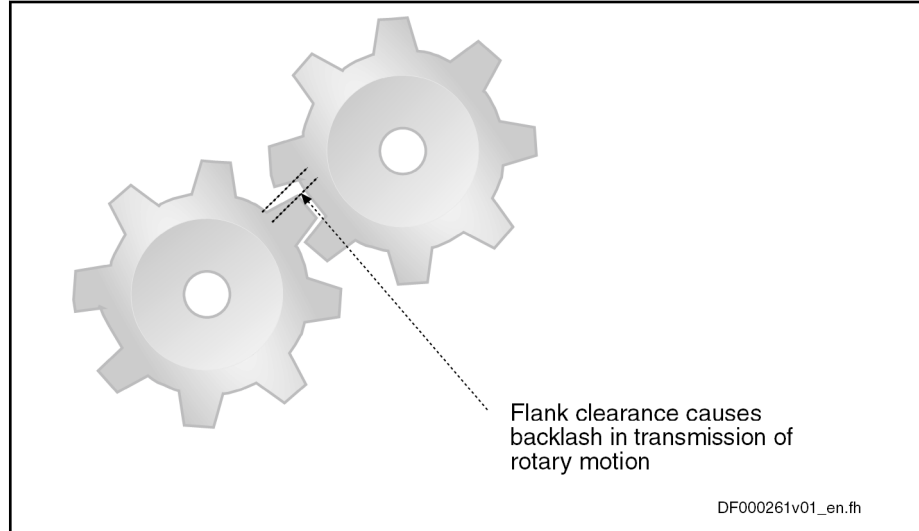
Illustration of Backlash with Toothed Wheels
